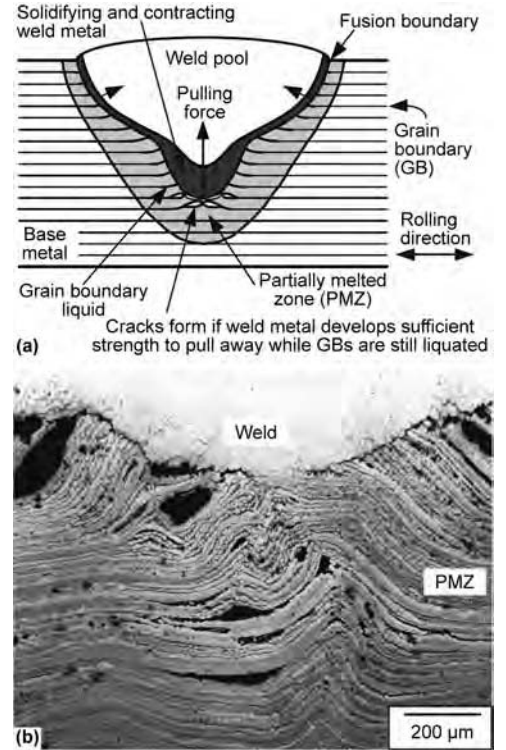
Weld metal pulling and tearing the partially melted zone (PMZ). (a) Schematic showing the formation of liquation cracking in the PMZ of a partial-penetration gas metal arc weld of an aluminum alloy. The welding direction is perpendicular to the rolling direction. The weld metal in the papillary penetration solidifies rapidly. This pulls the PMZ that is weakened by grain-boundary (GB) liquation. (b) Microstructure near the weld root of 7075 aluminum made with filler wire of aluminum 1100. The weld metal pulls and tears the PMZ near the tip of the papillary penetration. Source: Ref 63
